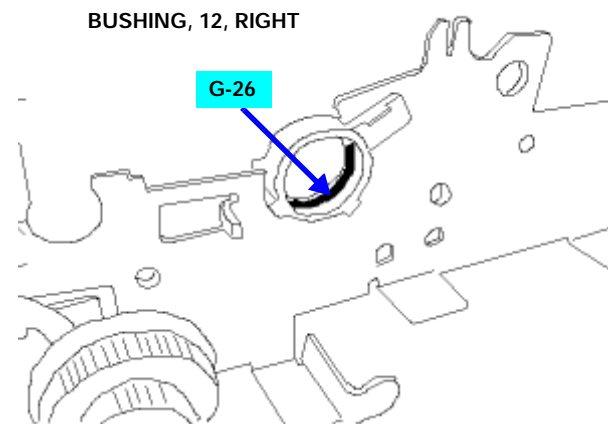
#6 Inside the PF Roller Bushing - Right
